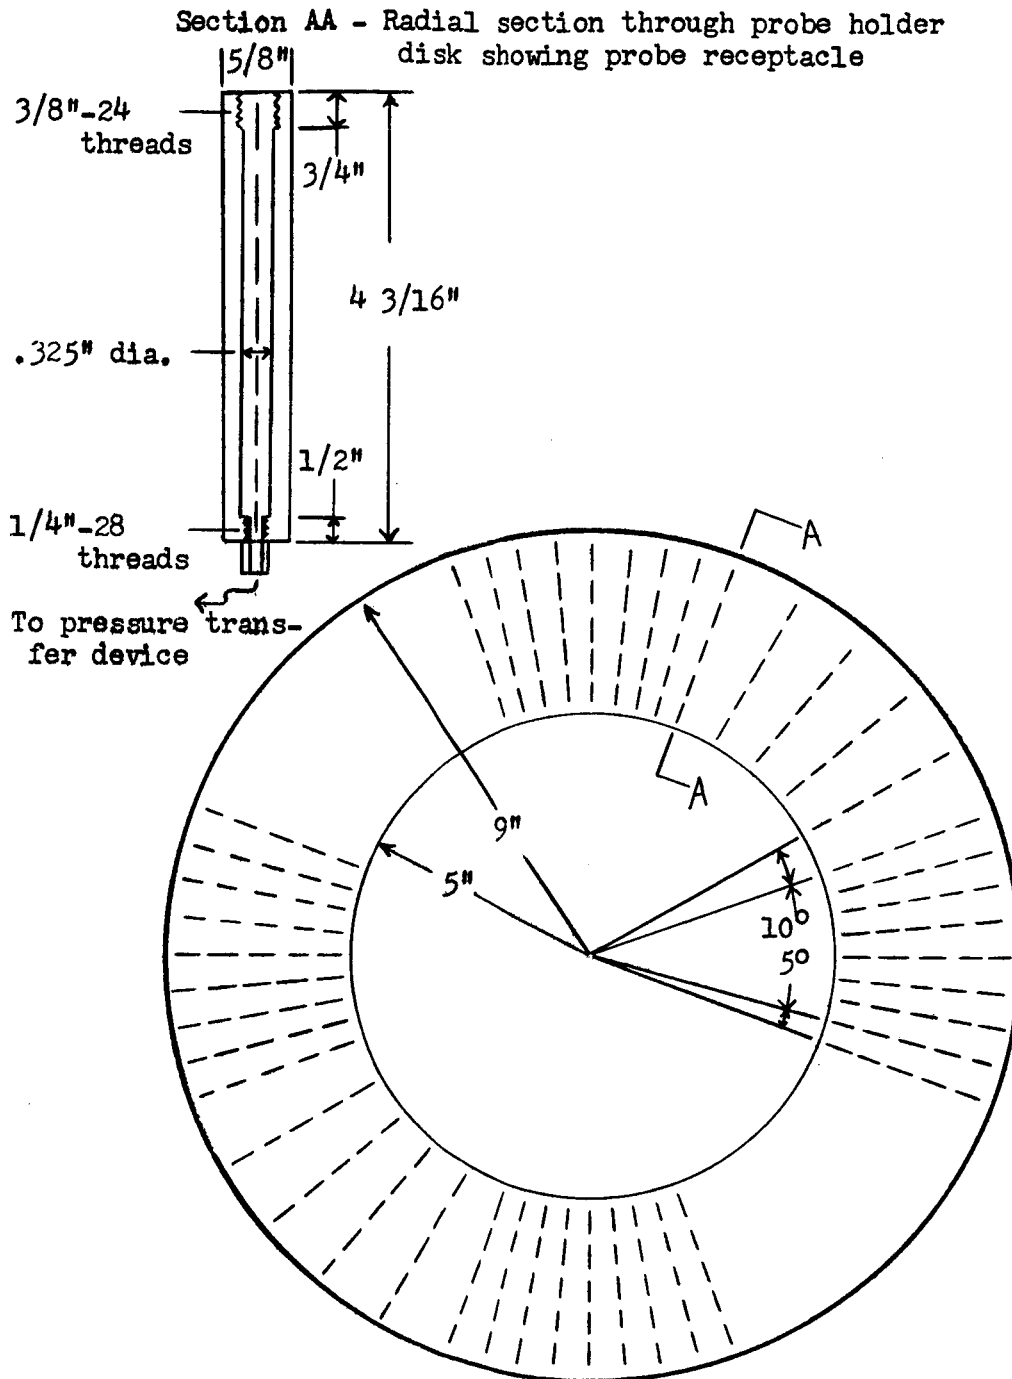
Detailed Drawing of Rotating Pressure Probe Holder
